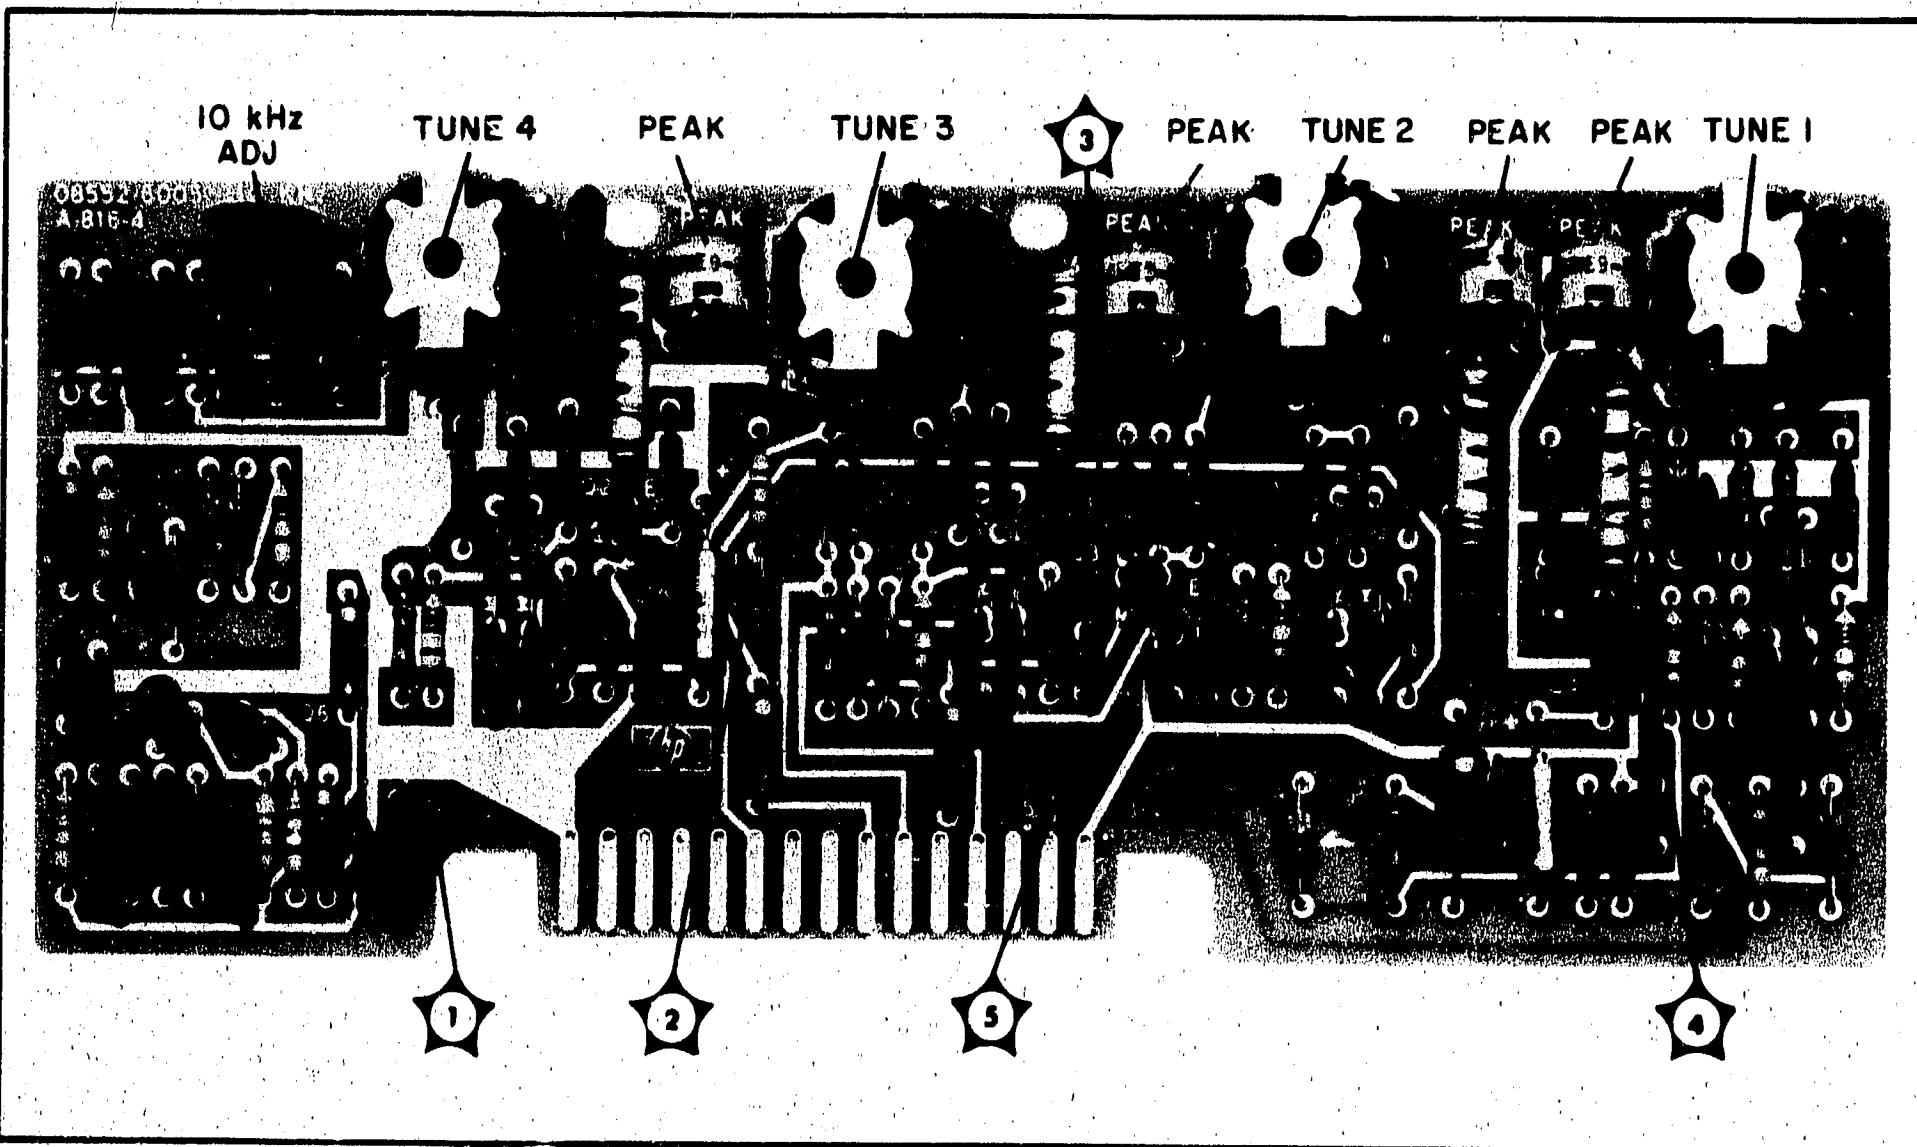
LC Filter Assembly A1 Test Point and Adjustment Identification
